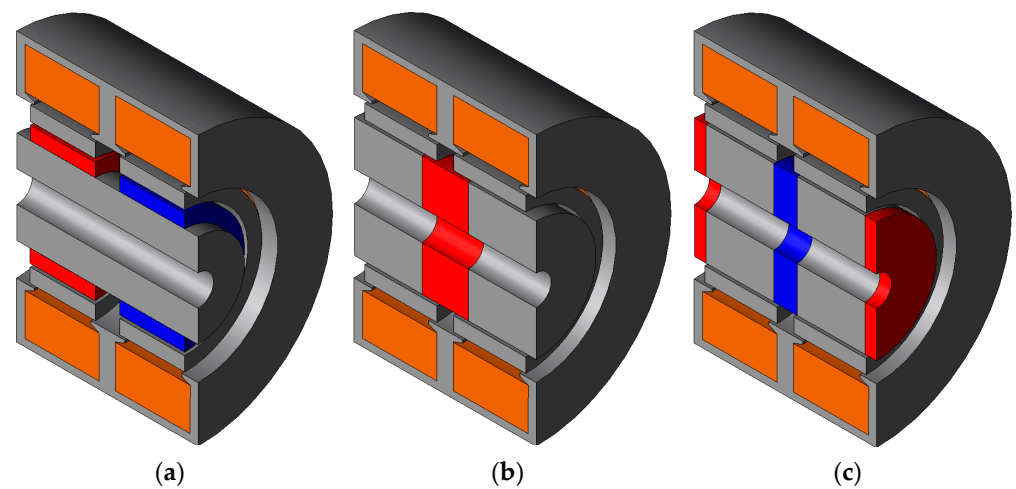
Three-dimensional views of proposed machine topologies with an inner space for assembly. (a) Partitioned stator single-phase short-stroke surface-mounted permanent magnet tubular machine (PS-SPSS-SPMTM); (b) Partitioned stator single-phase short-stroke interior permanent magnet tubular machine 1 (PS-IPSS-SPMTM-1); (c) Partitioned stator single-phase short-stroke interior permanent magnet tubular machine 2 (PS-SPSS-IPMTM-2).
